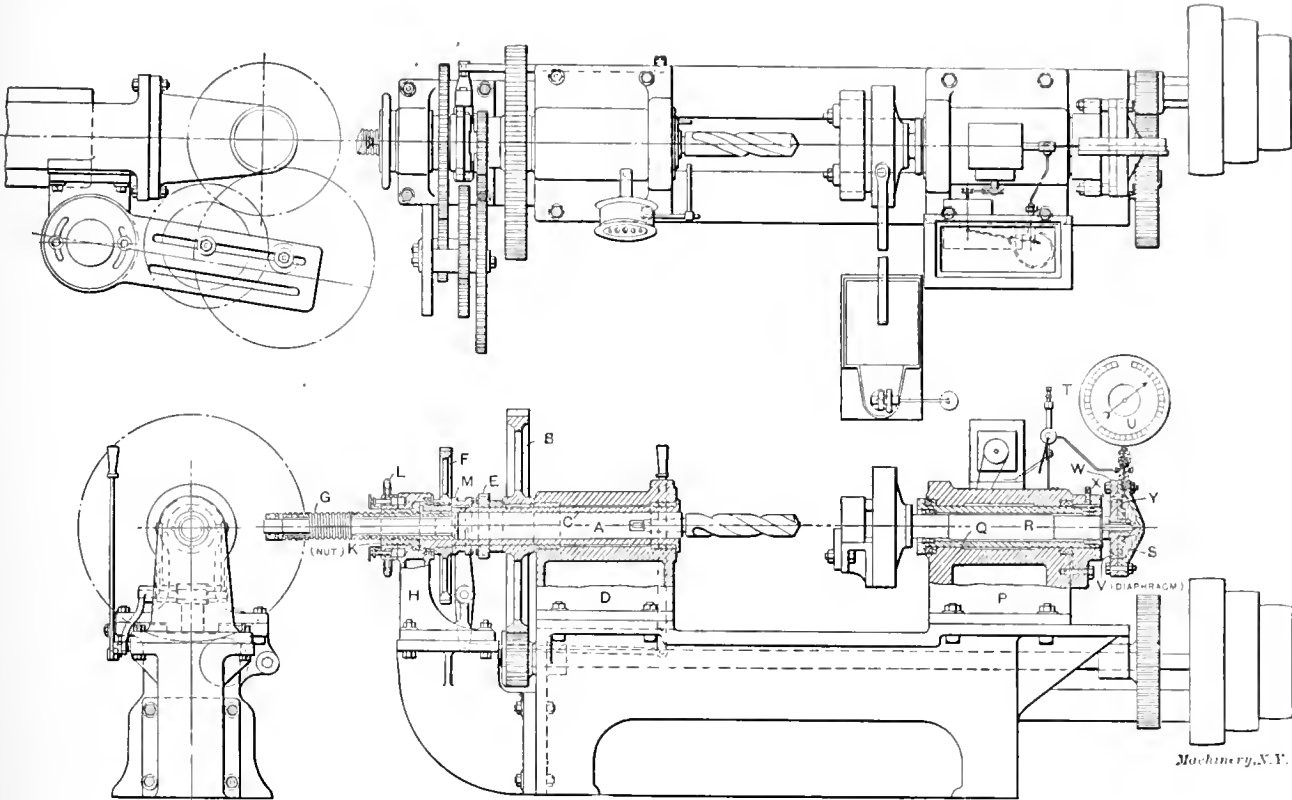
Section and Elevation of Apparatus used in Second Set of Experiments
